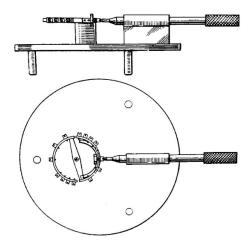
Tool to Chamfer the Head of Balance Screws
